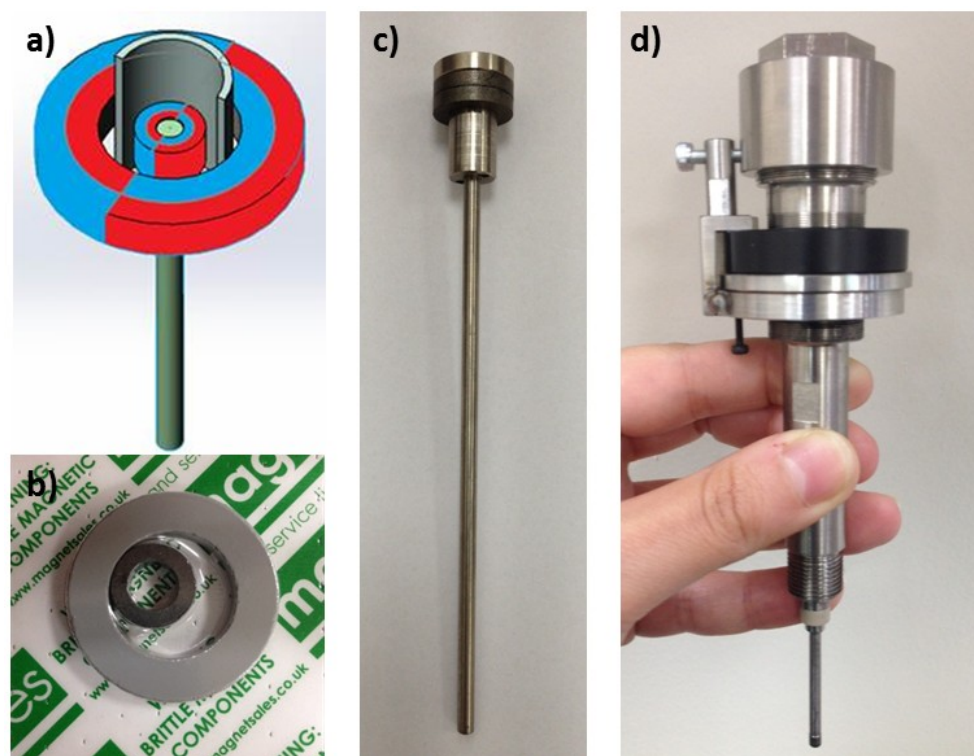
a) Magnet assembly drawing (Magnet Sales & Service Ltd). b) Iso Bonded NdFeB rings as supplied. c) Rod with the inner ring and magnets. d) Magnetic substrate adjuster assembly.
